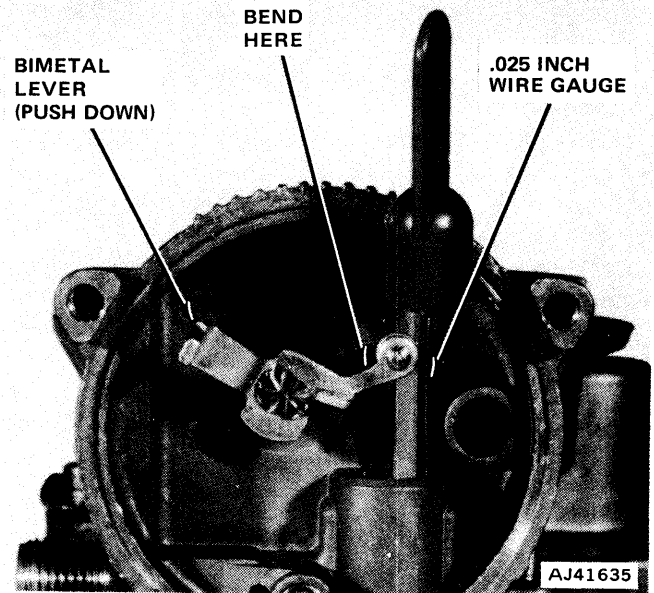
Initial Choke Valve Clearance Adjustment
